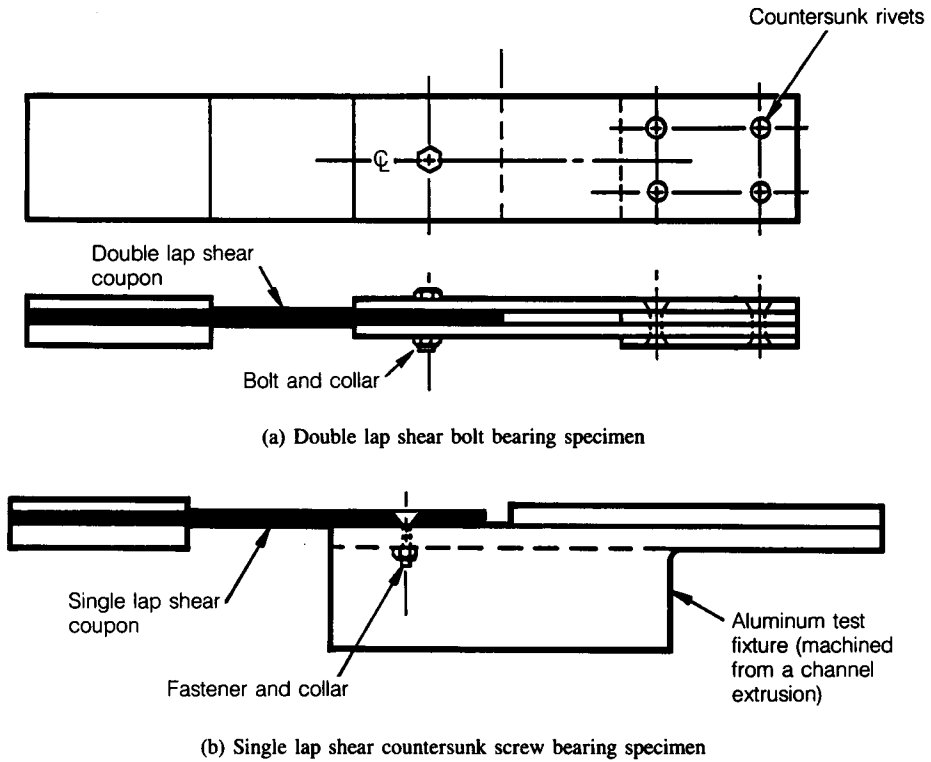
Examples Of Fastener Bearing Tests
